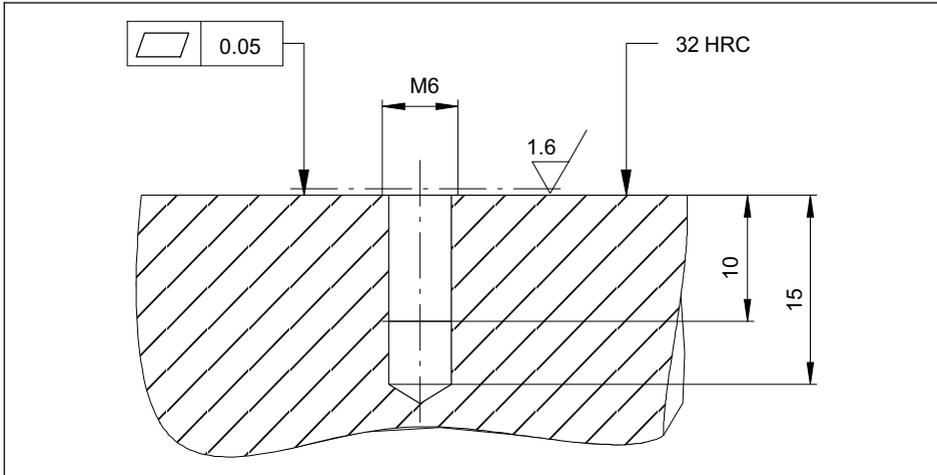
Surface quality of the workpiece on which the sensor is mounted
